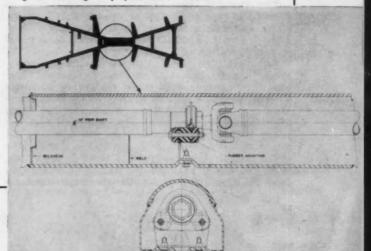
Section through floor at center pillar, for Eldorado Brougham.
